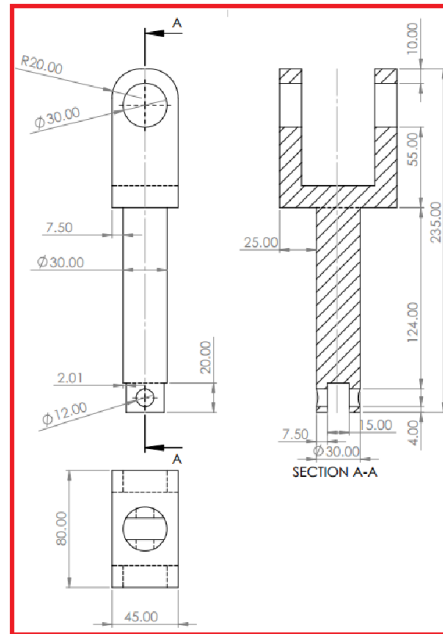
Middle Connector Geometry and Dimensions (mm)
